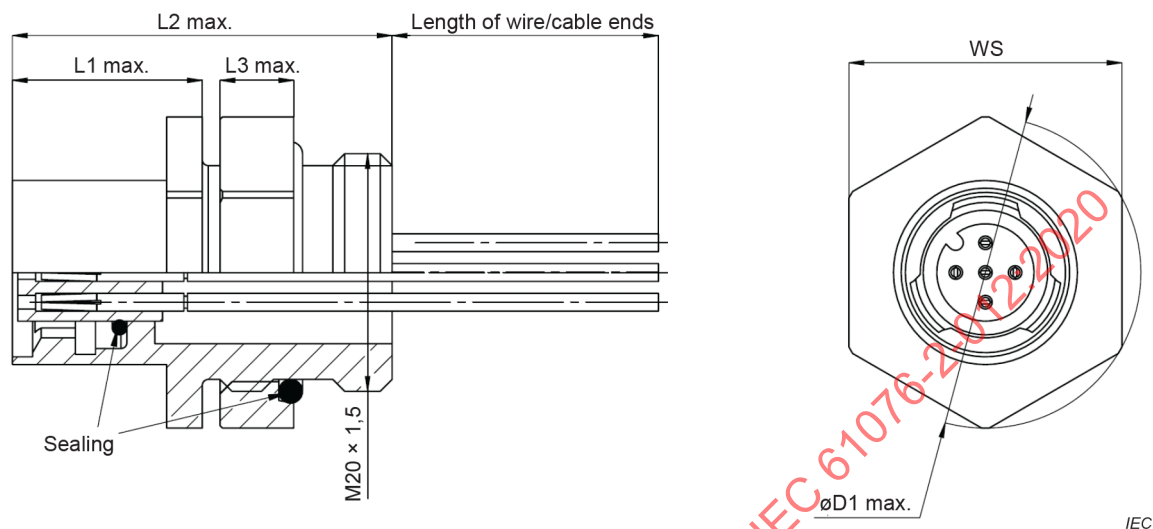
Style HF_M12_PPI – Fixed connector, female contacts, with inner push-pull and screw locking, mounting with thread M12 × 1, with wire/cable ends, single hole mounting thread M20 × 1,5, mounting orientation
